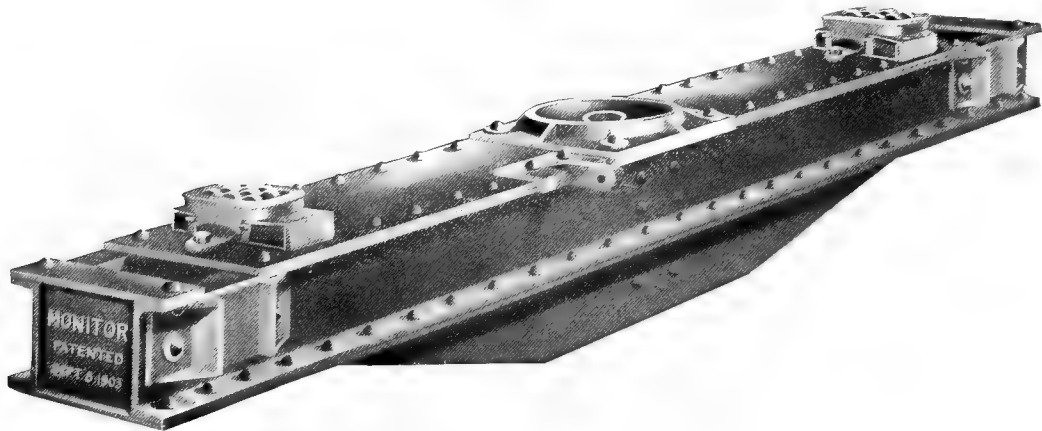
Monitor Truck Bolster with Creco Roller Side Bearings for Freight Cars. Chicago Railway Equipment Company.
